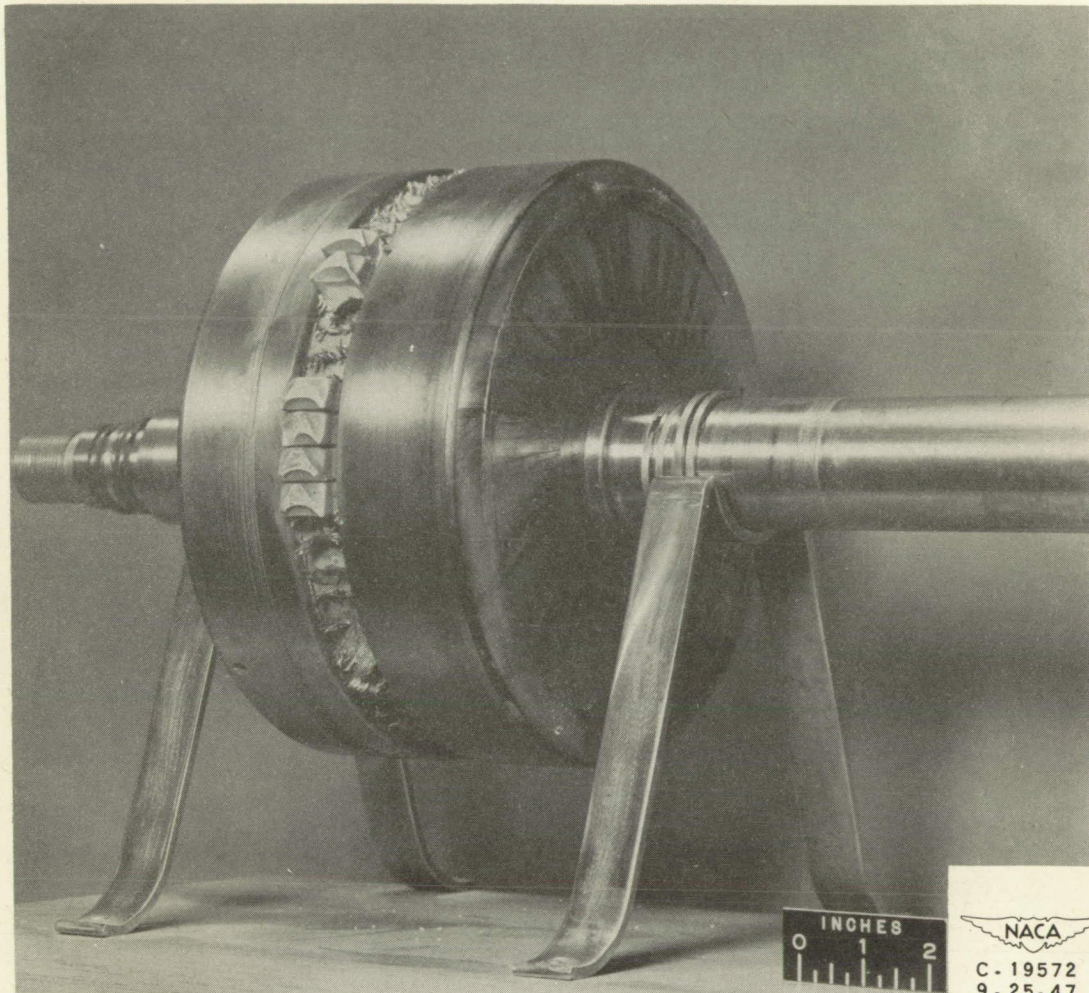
View of ceramic-bladed turbine disk, shaft, and blade-ring assembly from inlet side after forced shutdown caused by loss of air supply to turbine. Blade-ring assembly 4.
